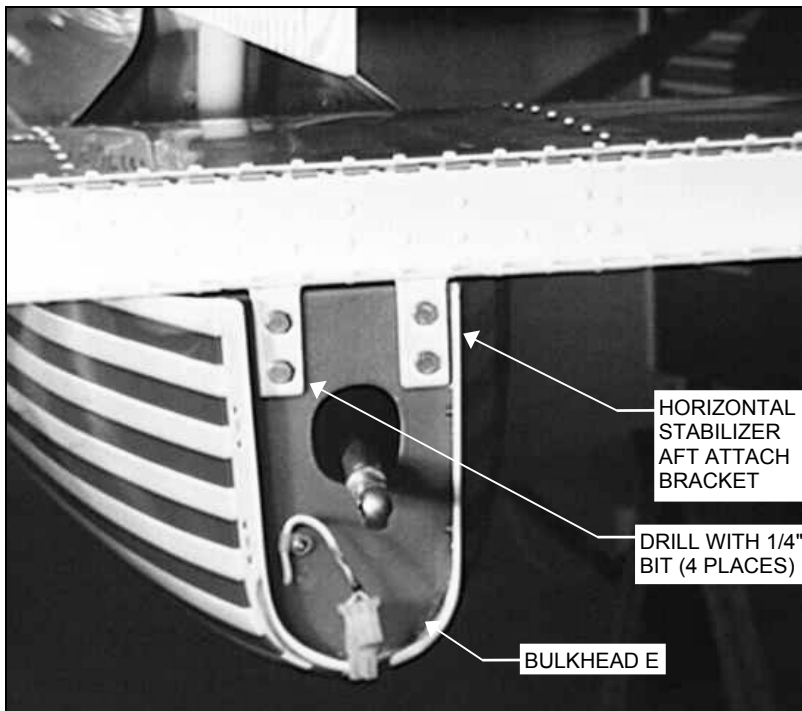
Drilling the Horizontal Stabilizer Aft Attach
